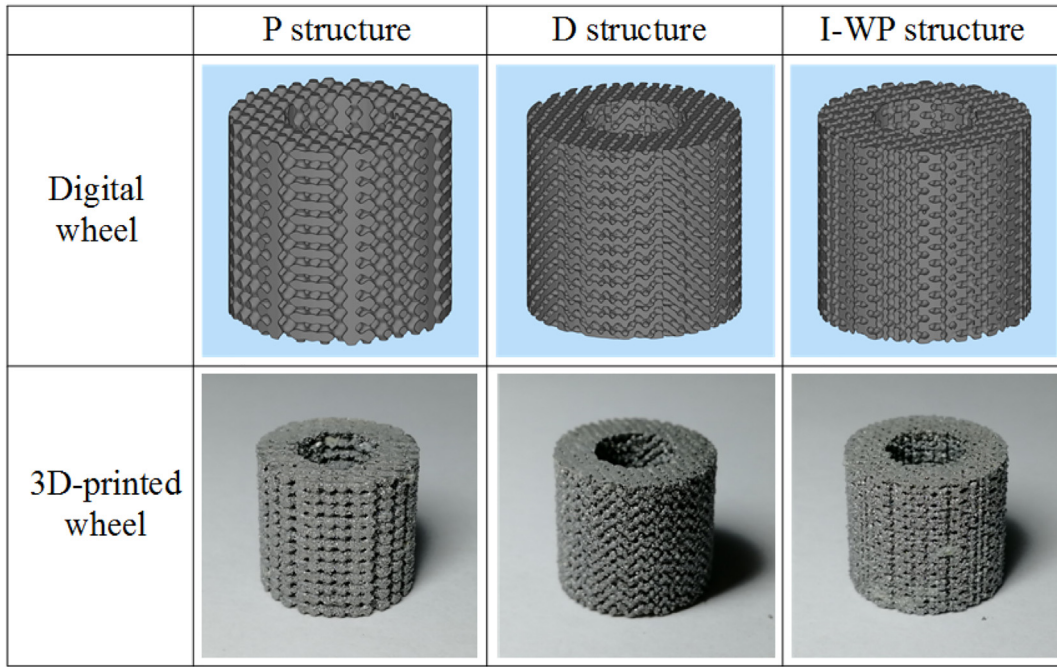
Digital models and 3D-printed samples of grinding wheels with pre-designed porous structures.
